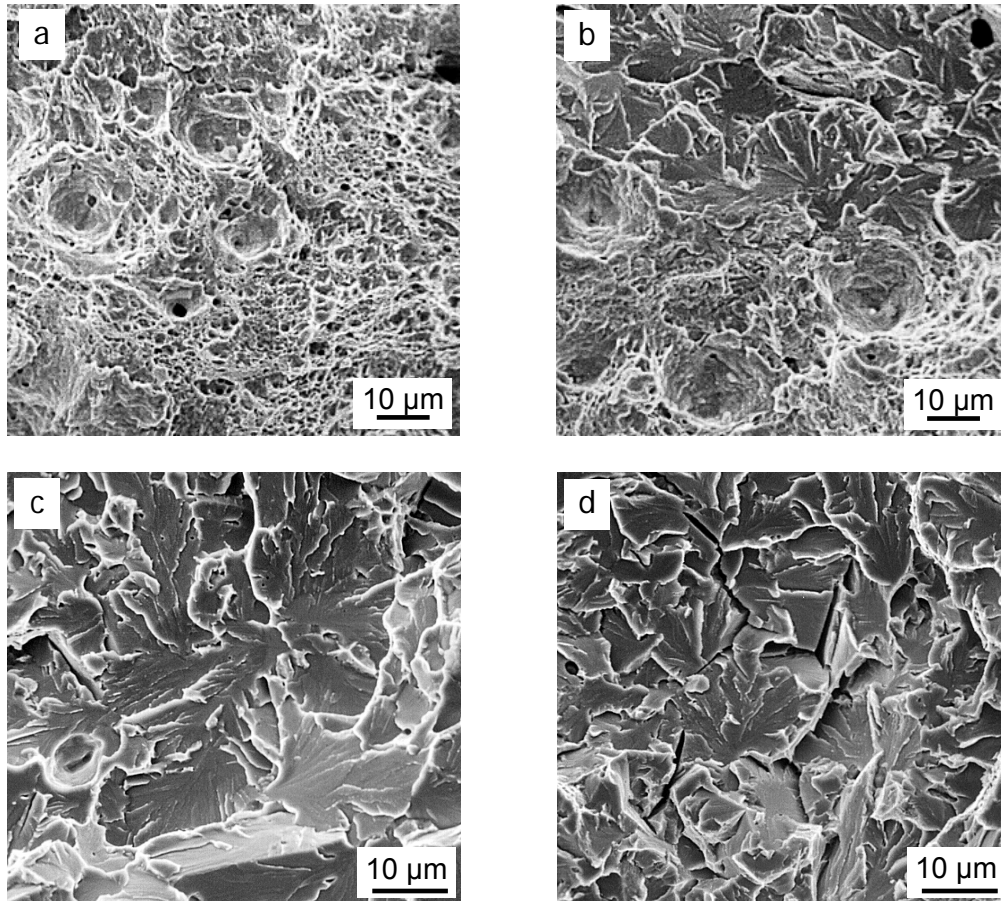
Fractography of the steel: a) ductile fracture close to the blunted crack tip, sample *T*/ -100°C ; b) conversion of ductile into cleavage failure, *T*/ -100°C ; c) brittle fracture at 0.6 mm from crack tip, *I*/ -100°C ; d) brittle fracture at 0.6 mm, *I*/ -100°C .
